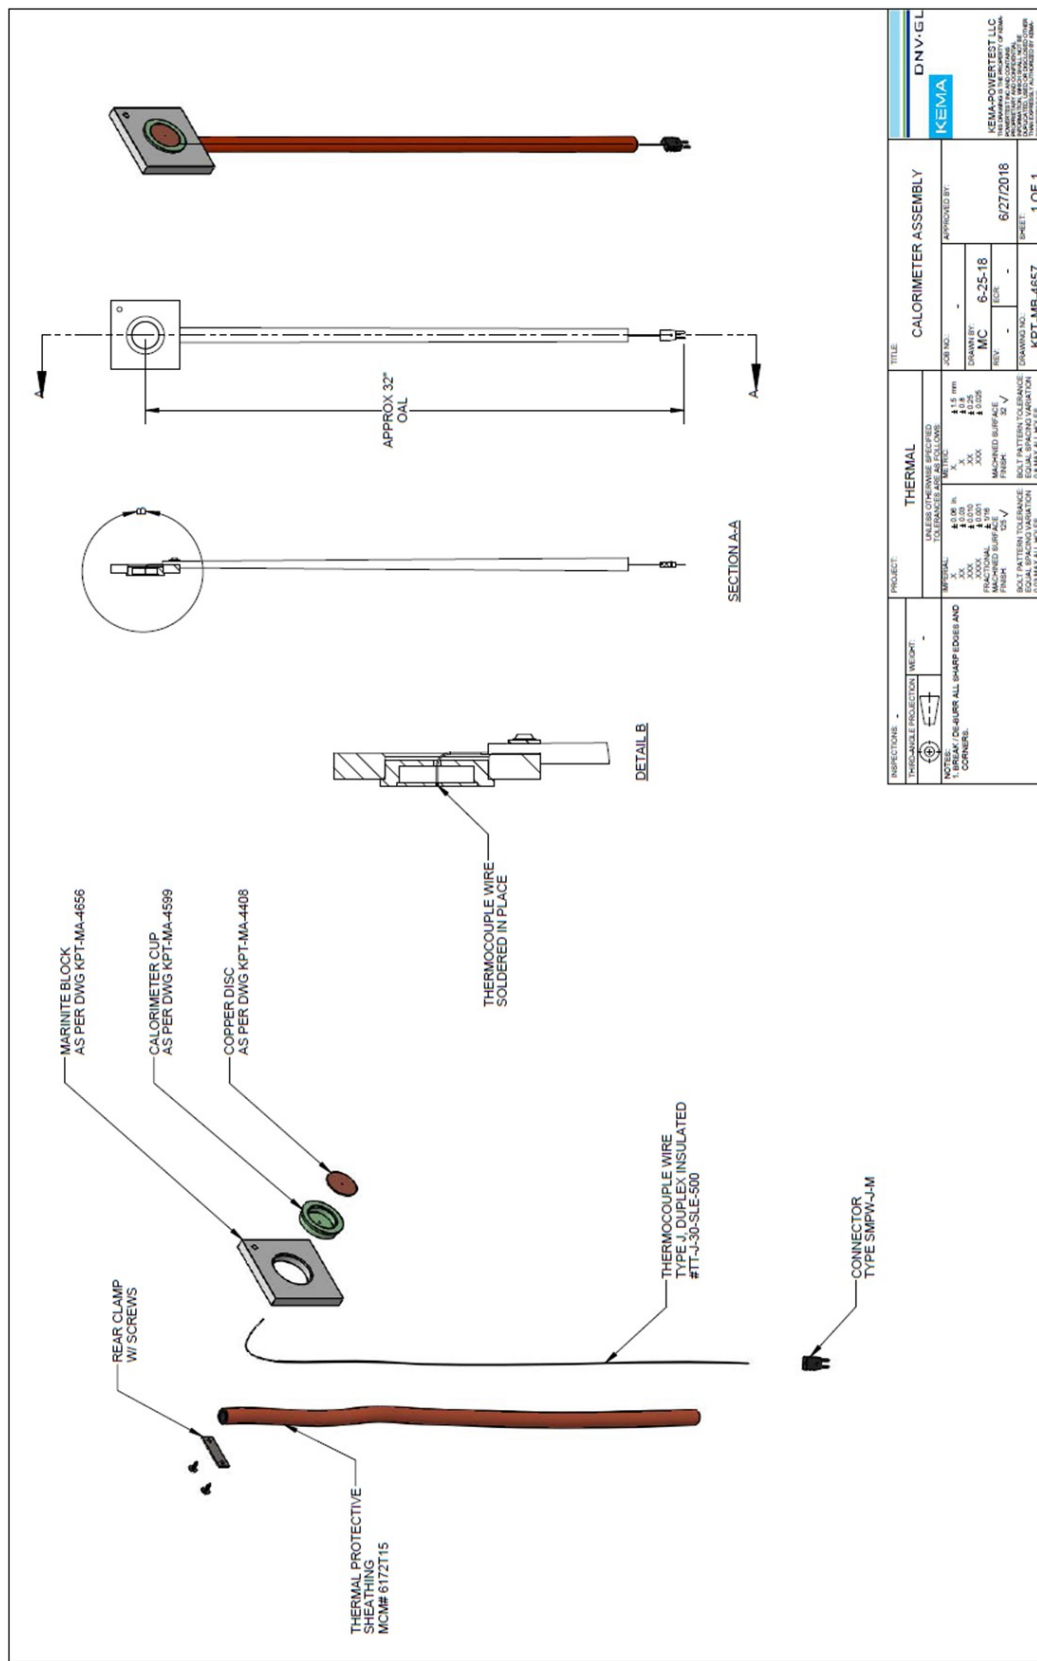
Drawing KPT-MB-4657, ASTM Calorimeter Assembly.
